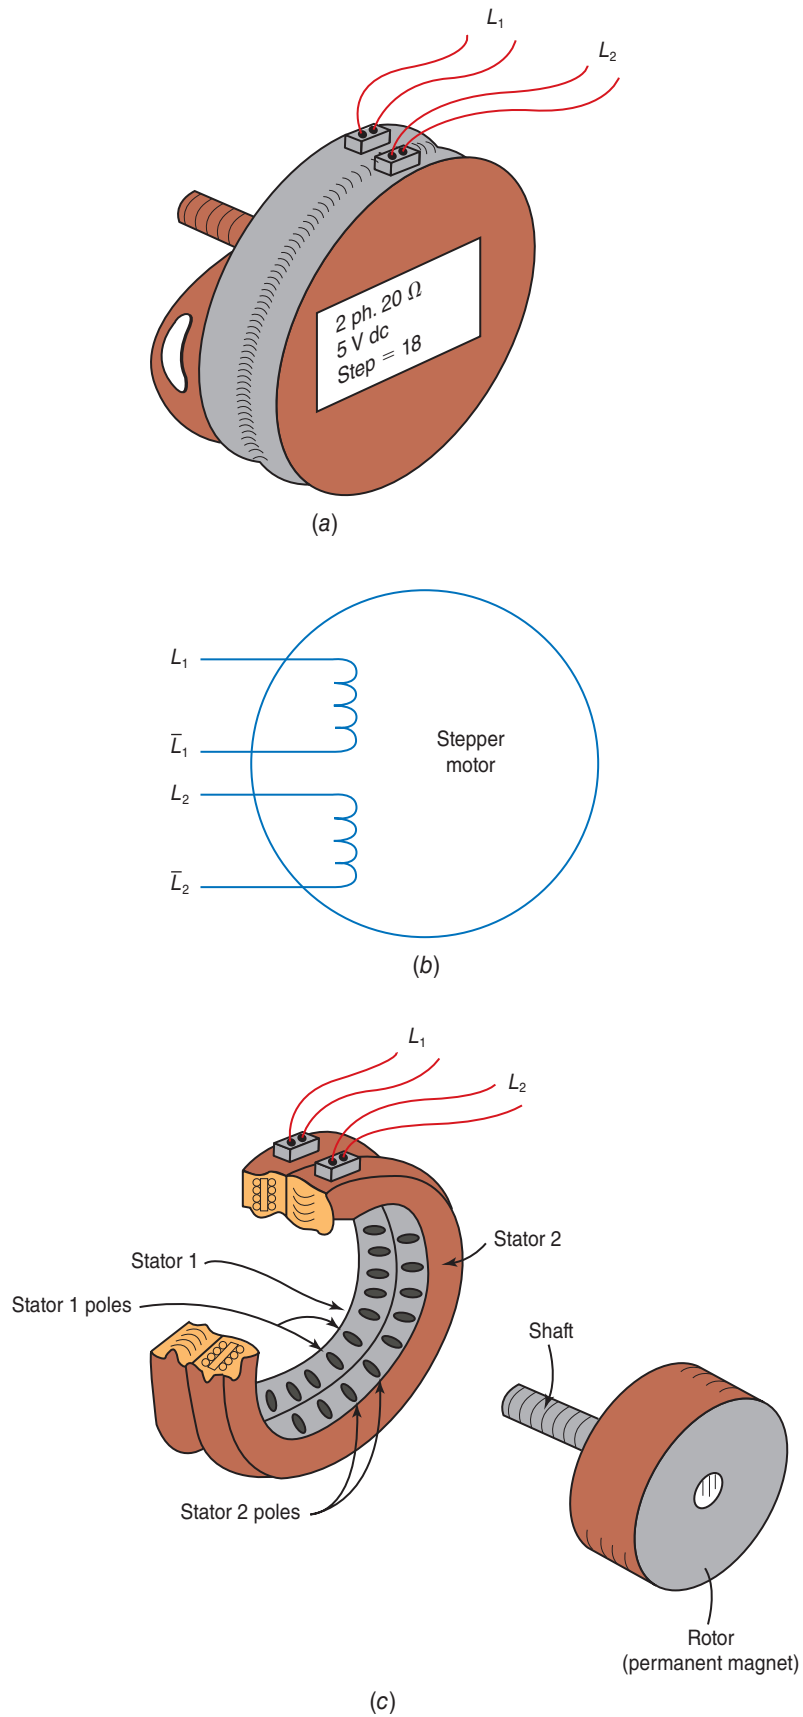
(a) Typical four-wire stepper motor. (b) Schematic of four-wire bipolar stepper motor. (c) Simple exploded view of typical permanent magnet type stepper motor.
